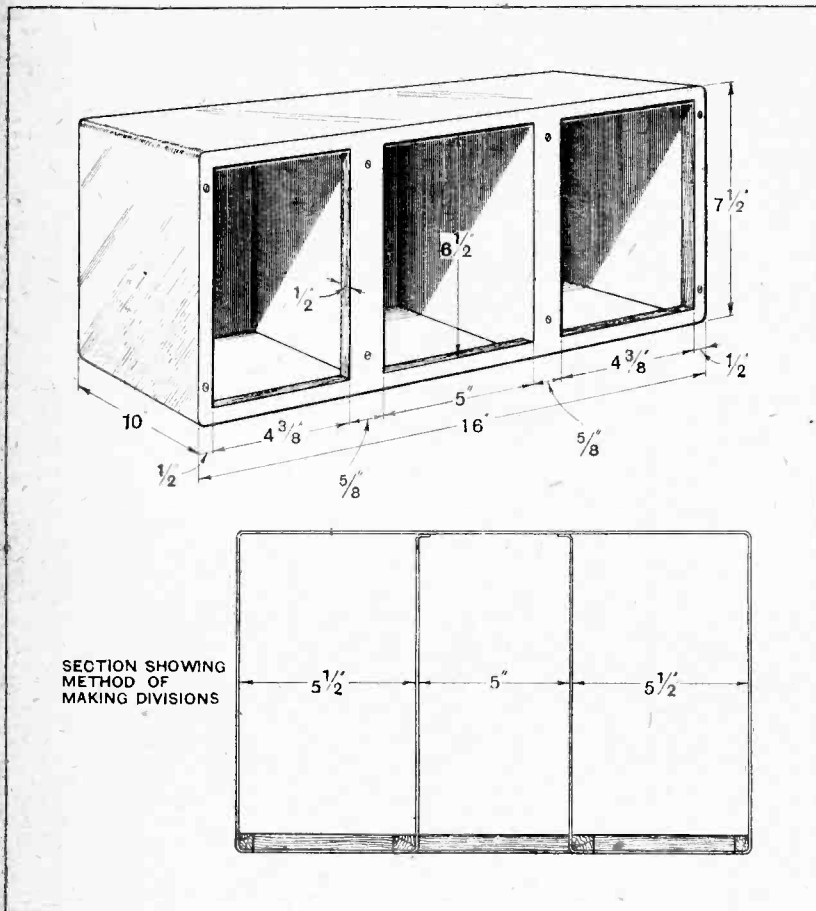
Details of the box, which is of No. 24 gauge. It is of copper, and the two partitions are soldered into position. Round the inside front edge is a framework of wood held by screws as shown. Further holes are drilled through the edges to take the screws holding the cover.
